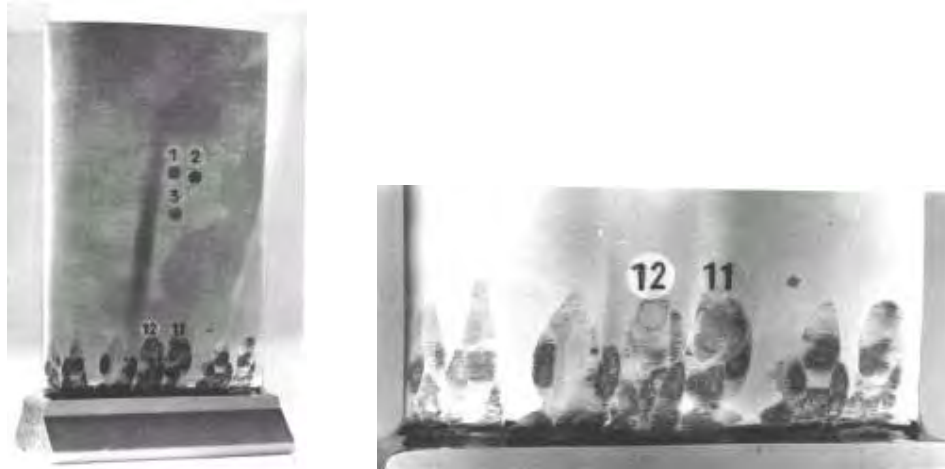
Corrosion damage on rotor blade indicating EPR test locations view of entire blade (left) and detailed view of blade base (right)
